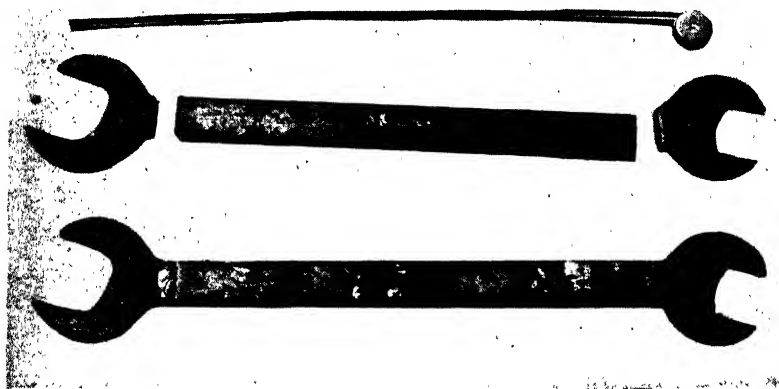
This wrench was originally made by flame-cutting the whole wrench from plate. By redesigning it, the heads were flame-cut from plate scrap, the handle was sheared from bar stock and welded to the heads, better use was made of material, and the cost of the wrench was reduced. (Courtesy of R. G. LeTourneau, Inc.)
